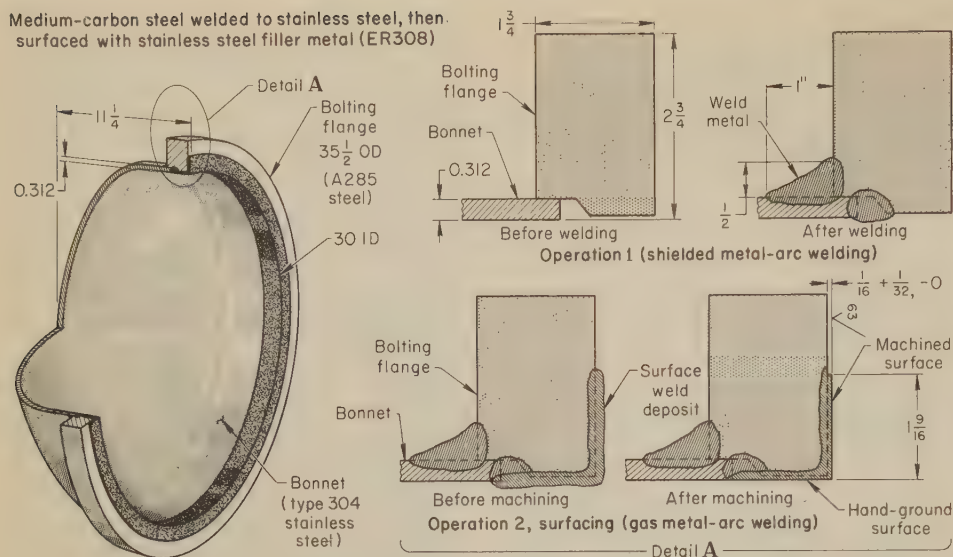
Assembly for which relocation of fillet welds would improve accessibility and thus allow use of gas metal-arc welding
